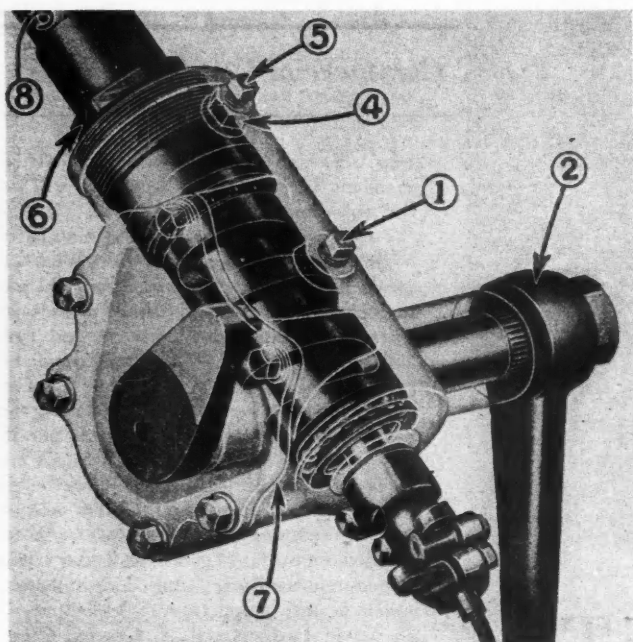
End play in shaft of this type gear is adjusted by shims under the side cover
